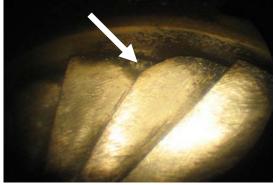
Defects of marine diesel engines' turbocompressors detected during endoscopic investigations
